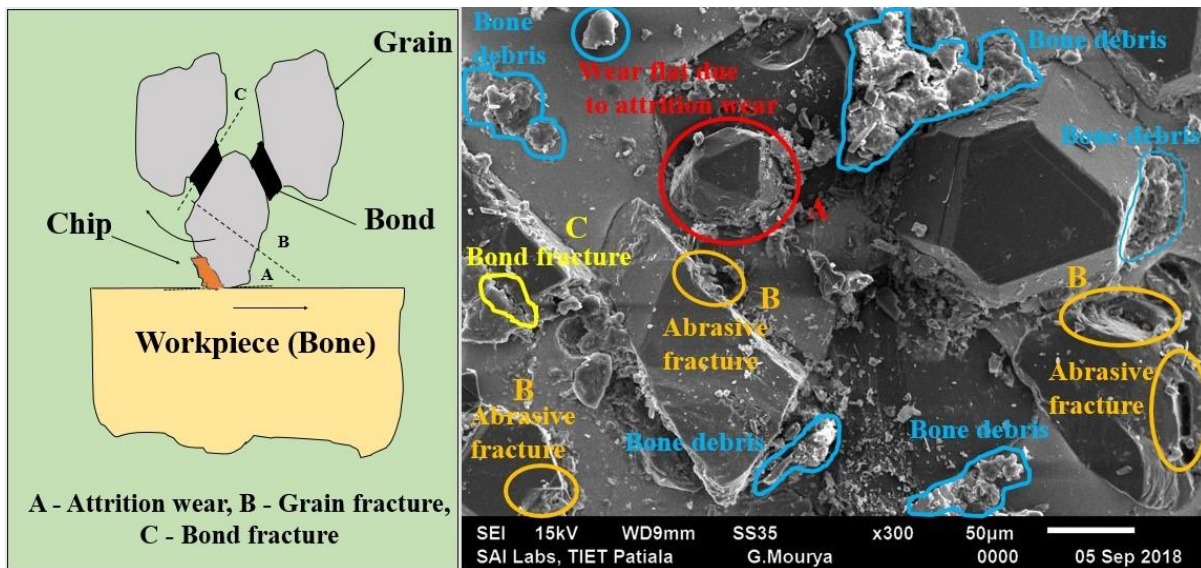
Schematic of three types of tool wear: (A) attrition wear, (B) grain fracture, and (C) bond failure.
